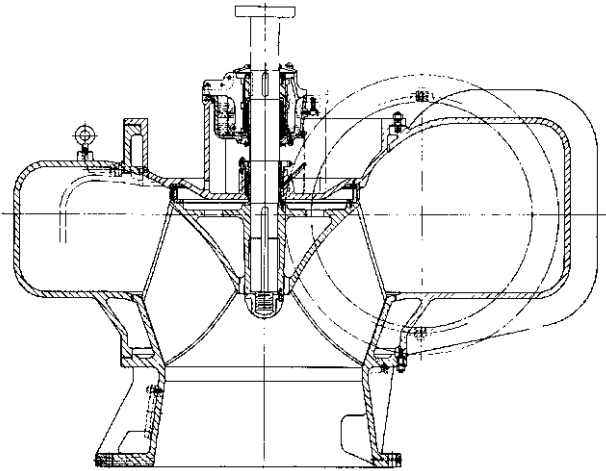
A section of a large, vertical, bottom-suction volute pump with a single sleeve bearing (Flowserve Corporation)
